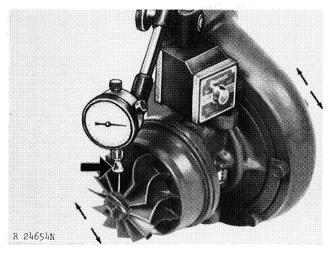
Dial Indicator Installed To Measure Radial Movement
